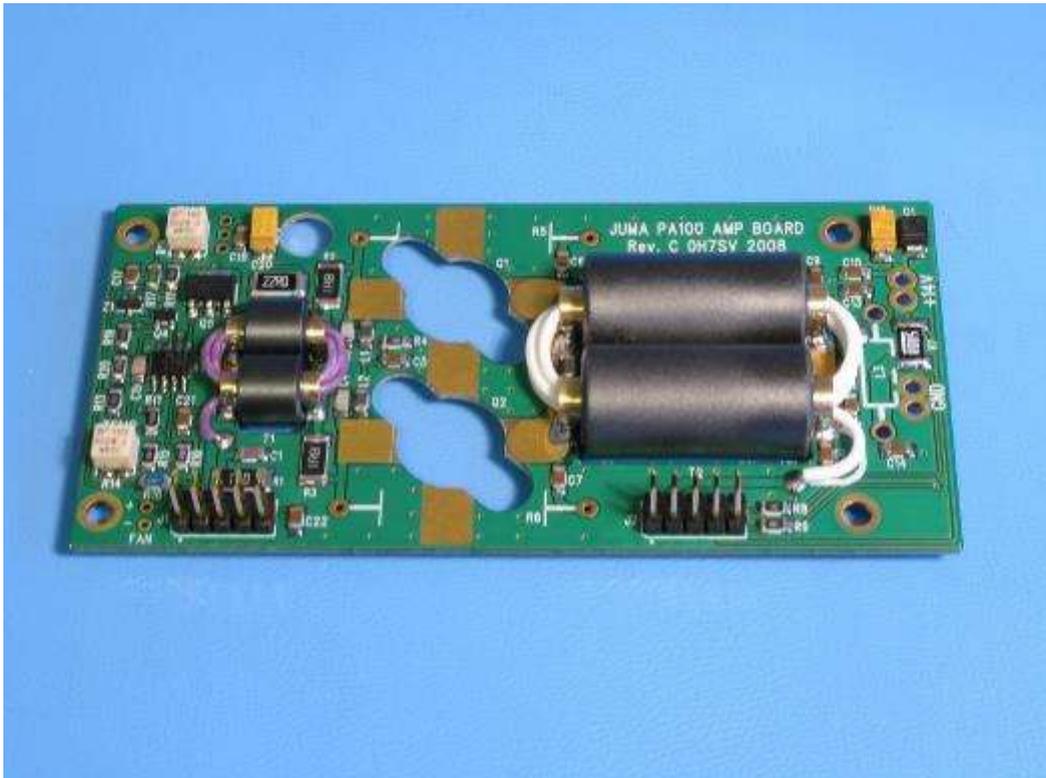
Cut and peel the other end of the wire and solder the end point of the T2 winding.
